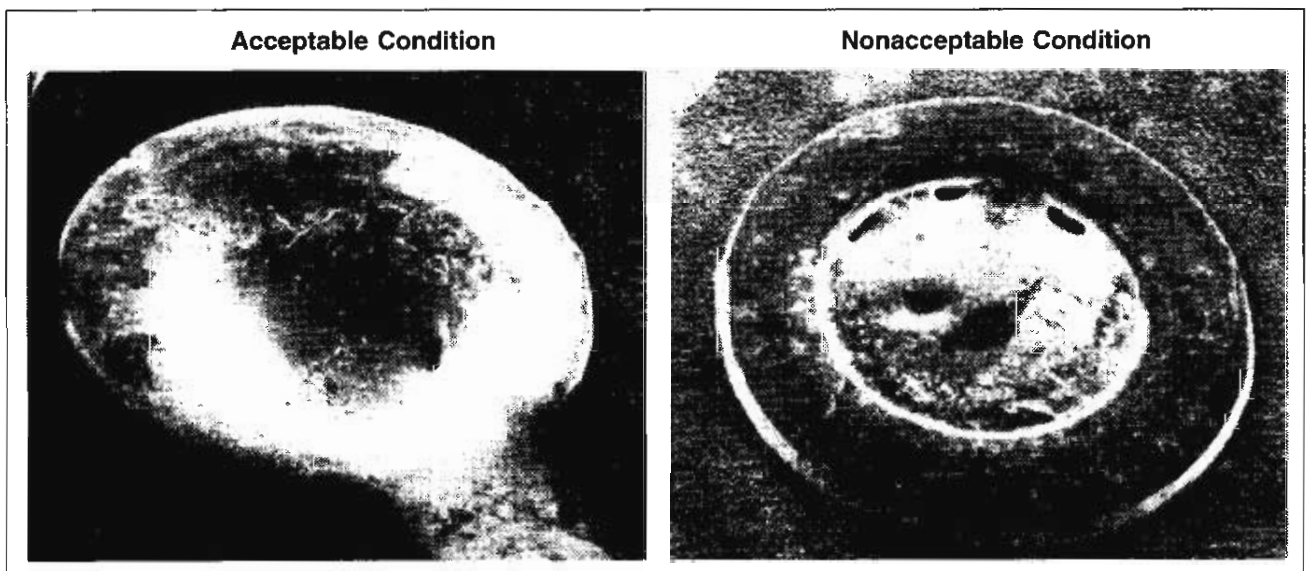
Examples of Solder Wetting of Plated-Through Holes - Class 3
